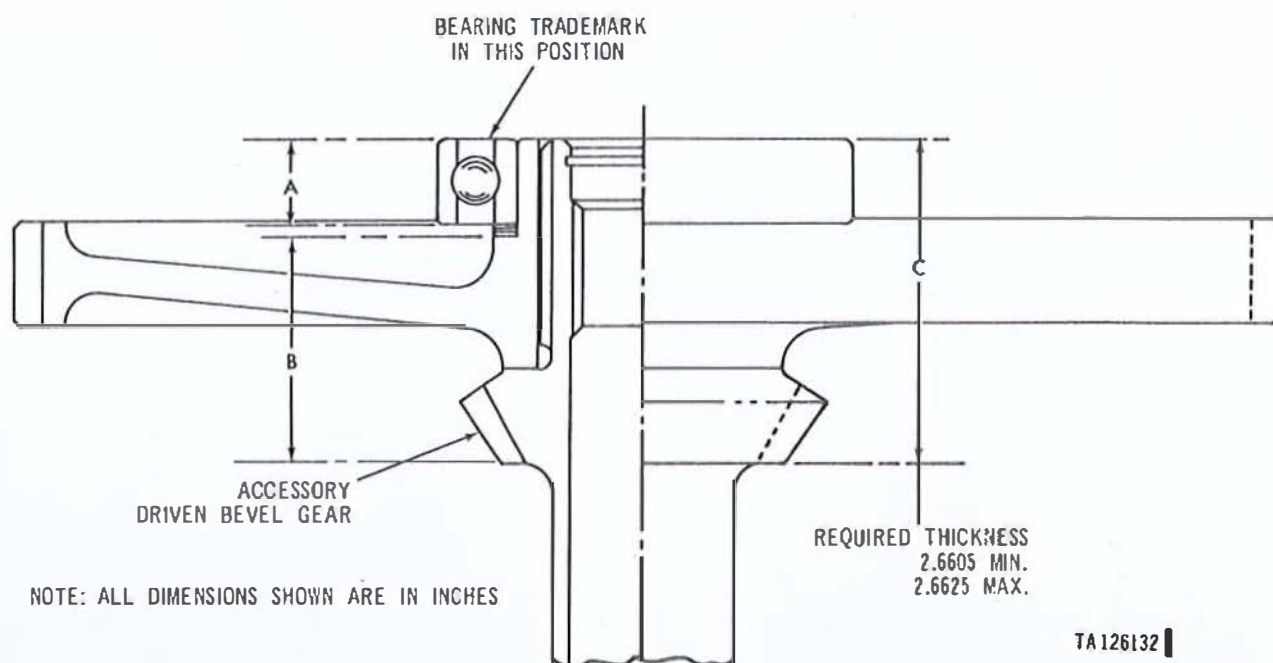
Determining shim thickness for accessory drive bevel gearshaft bearing.
